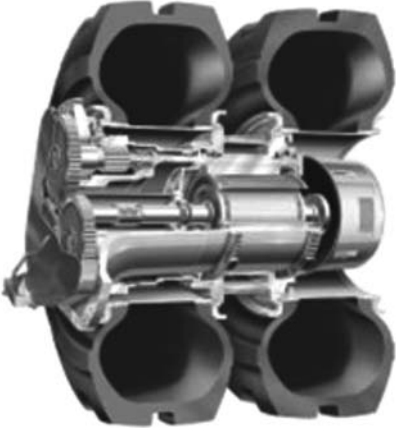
Diagrammatic representation of a wheel motor assembly. Komatsu (2012).
